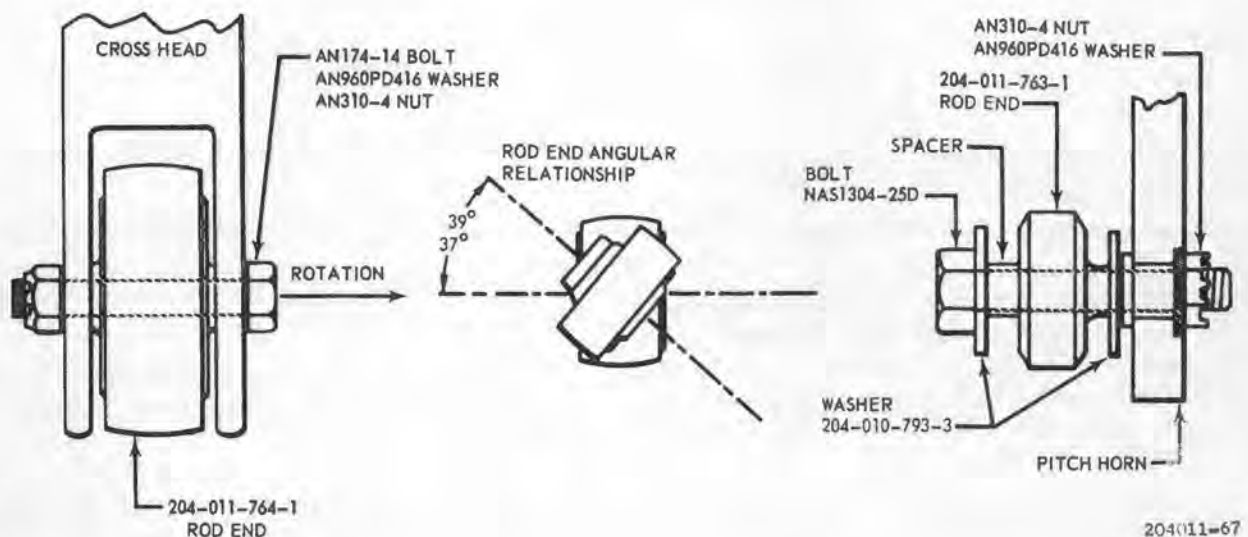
Link assembly installation (UH-1B Serial No. 60-3546 thru 64-14100)
